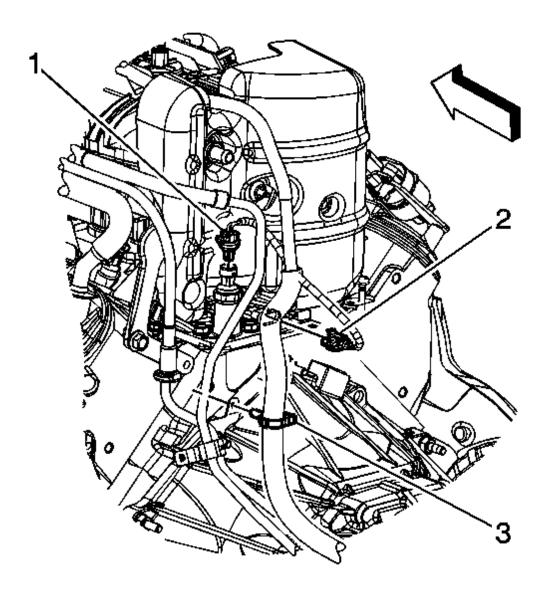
View Of Engine Harness Electrical Connectors & Inlet Hose Clamp Courtesy of GENERAL MOTORS CORP.
